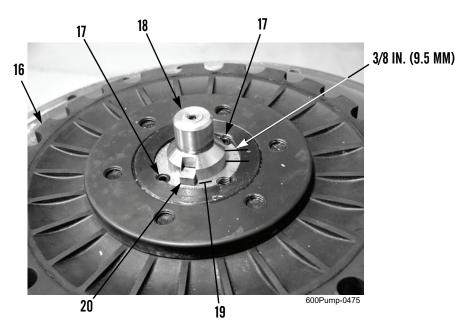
Installing Flexible Coupling on Impeller Shaft.
